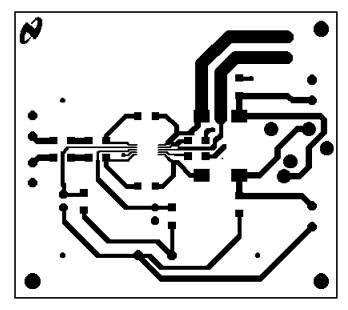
Recommended MM PC Board Layout: Component-Side Layout
